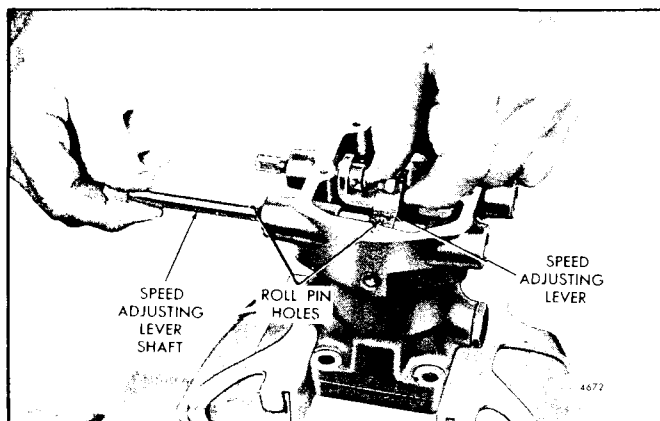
Installing Speed Adjusting Lever Shaft in Governor Housing and Adjusting Lever
